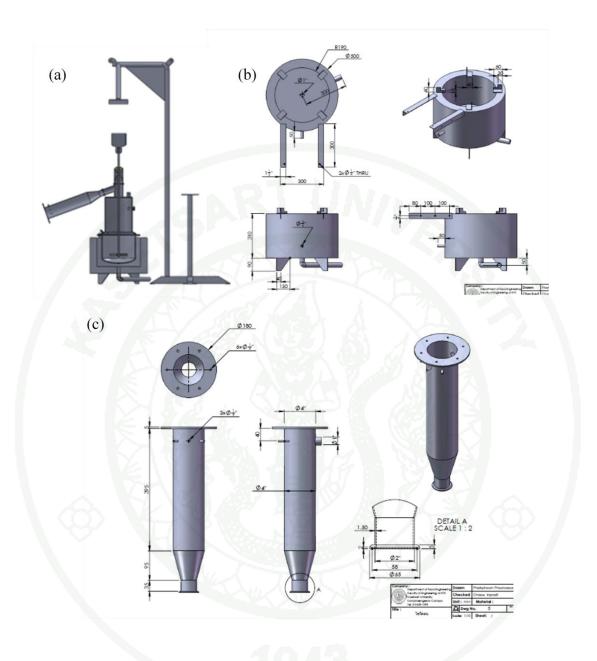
Drawing of (a) system setup (b) cylindrical kettle with open cover with heating jacket reactor and (c) condenser.
